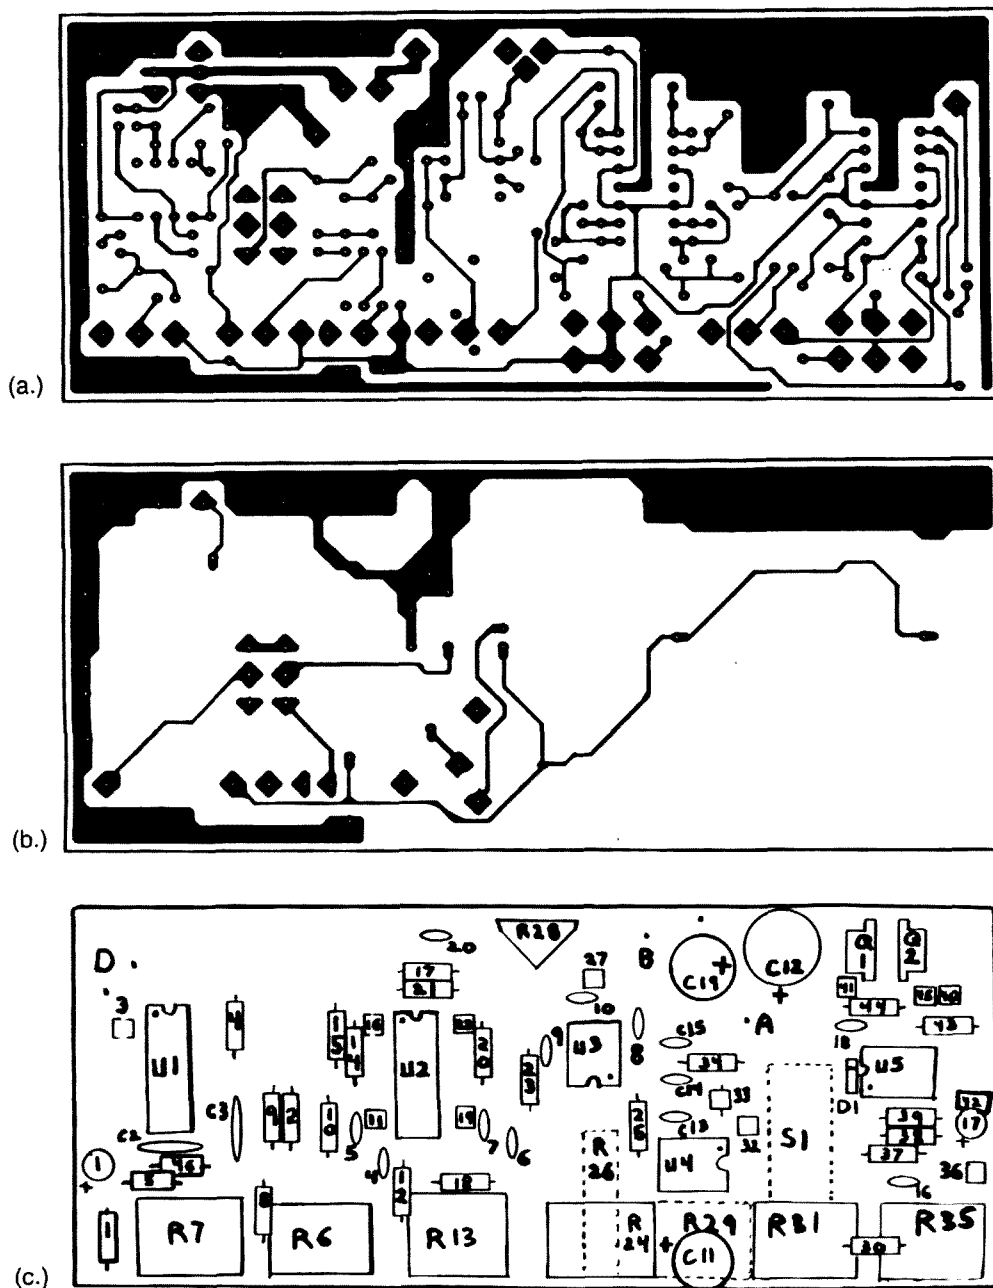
Double-sided PC board layout: a. Solder side; b. Component side; c. Parts placement diagram.
